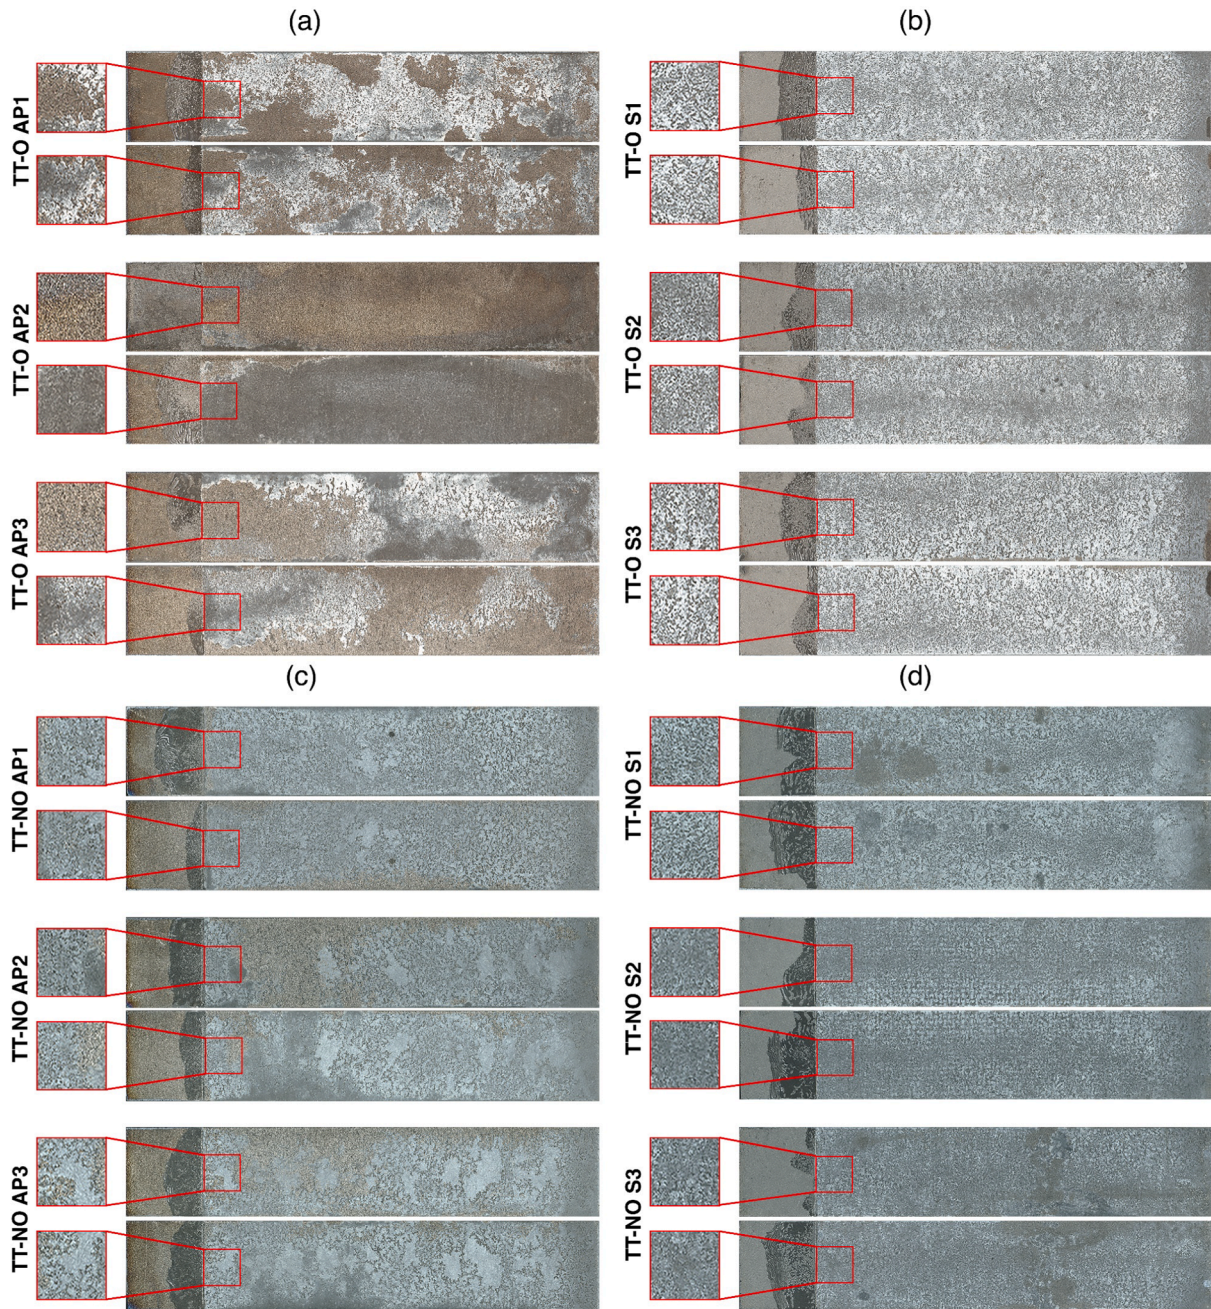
Fracture surfaces of titanium-titanium joints. The crack initiation area has been highlighted and enlarged.
